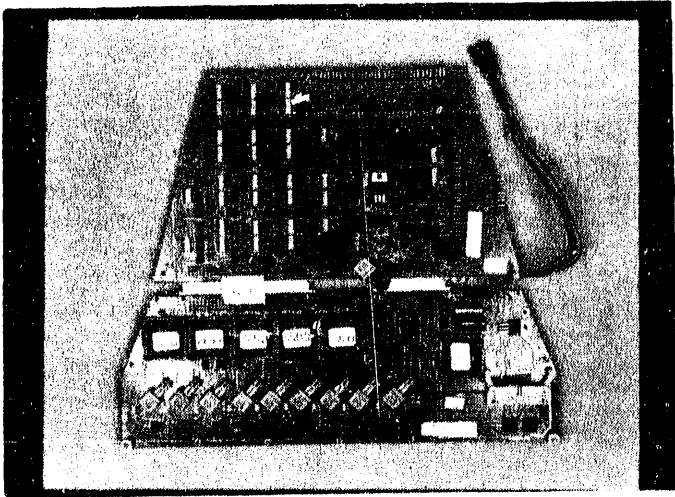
Picture of the top side of the controller and transition boards. The boards are plugged together by a 96-pin and a 48-pin connector. Both boards also have surface-mount components mounted on the back-side.
